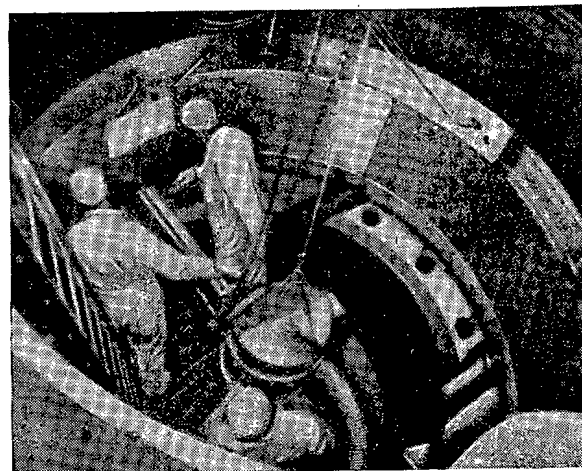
Assembly of equipment inside reactor pressure vessel.
